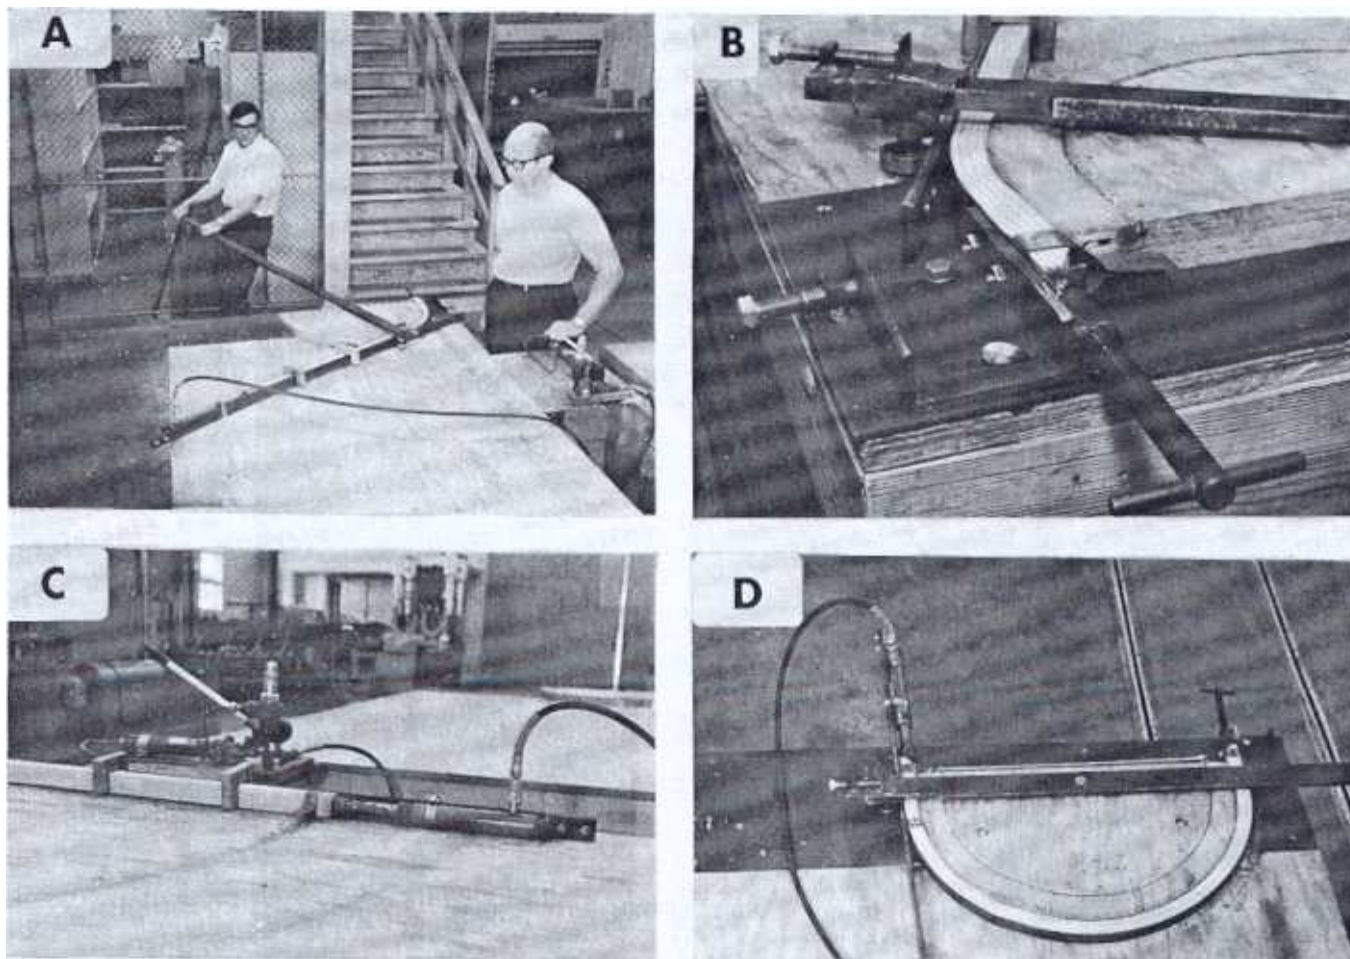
Bending jig with 1-inch-thick specimen in place. (A) As the lever bar is moved around its pivot, a constant end load is maintained by means of a hydraulic cylinder. Two removable plywood clips to prevent specimen bow are visible. (B) End clamp. The thin metal band running around convex side of specimen is attached to the hydraulic cylinder. Pivoted lever bar with ball-bearing pressure point is shown rolling over the thick steel bar also attached to the hydraulic cylinder. (C) Hydraulic pump, cylinder, and pressure controlled by-pass valve for application of controlled force to reduce tension in convex side of specimen. (D) Specimen bent in full semicircle and ready for removal. Retaining rod is secured to metal end clips visible in Figures 2B and C.
